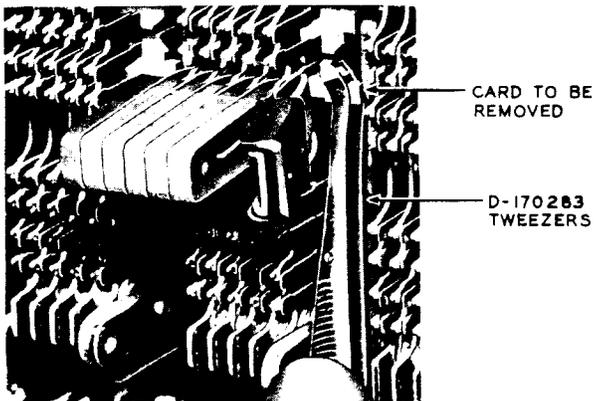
Rotating Card to a Flat Position With Tweezers
